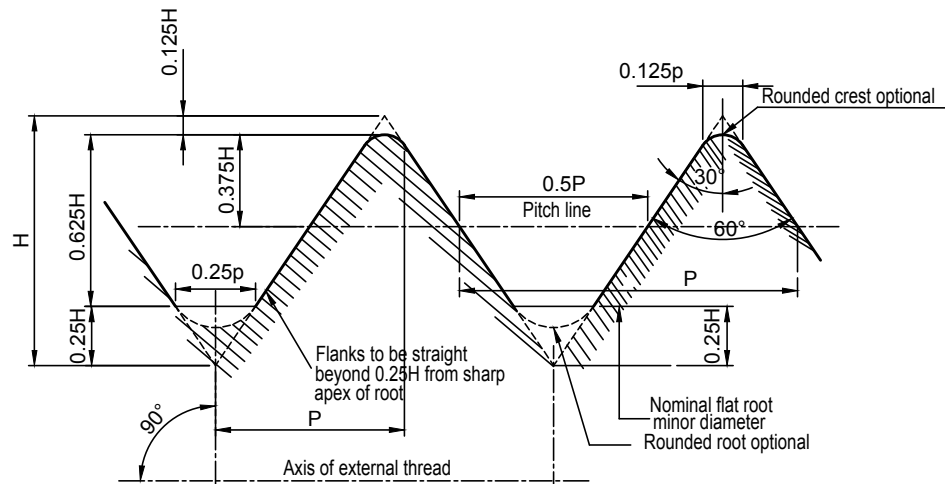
THREAD PROFILE FOR UNF THREAD - EXTERNAL
